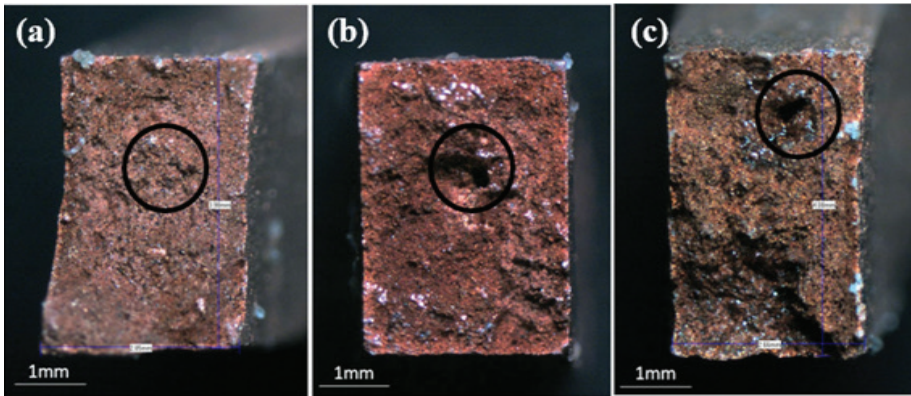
Fracture surface of the final sintered parts at different sintering parameters: (a)950°C, (b)1000°C and (c) 1050°C
